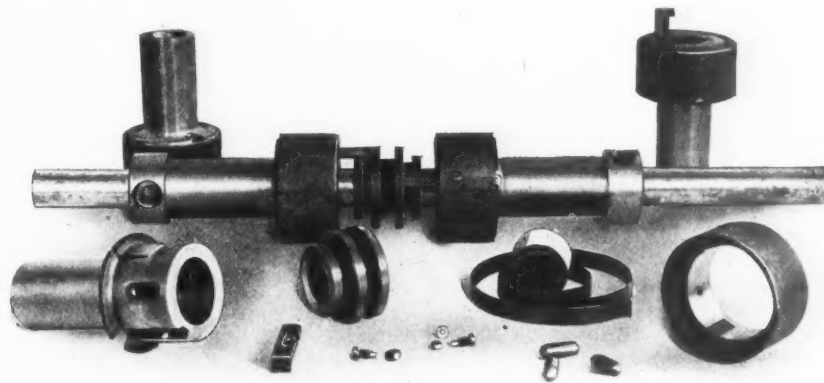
View showing Single and Double Bicknell-Thomas Clutch and Component Parts
